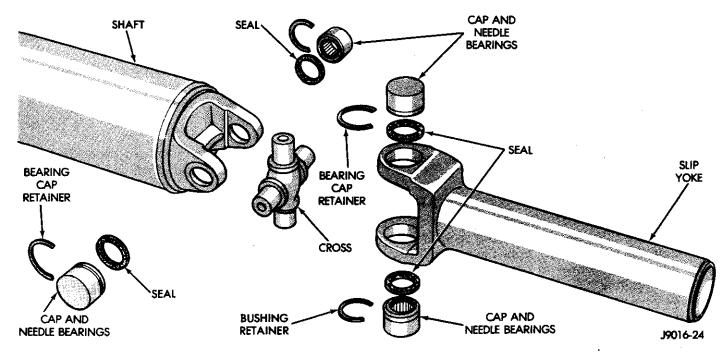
Single Cardan U-Joint At Slip Yoke—Disassembled
